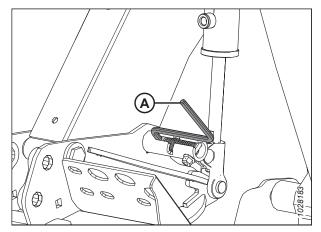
Engaged Reel Safety Prop - Center Arm
